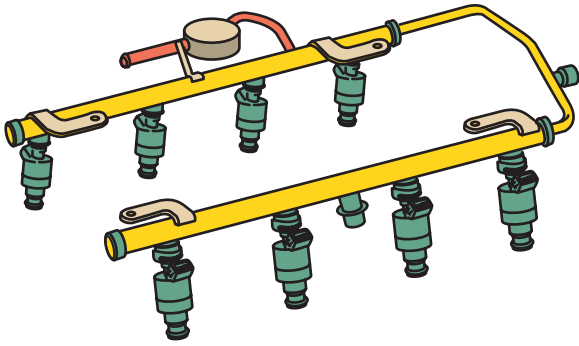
A one-piece fuel rail for a V8 engine.
